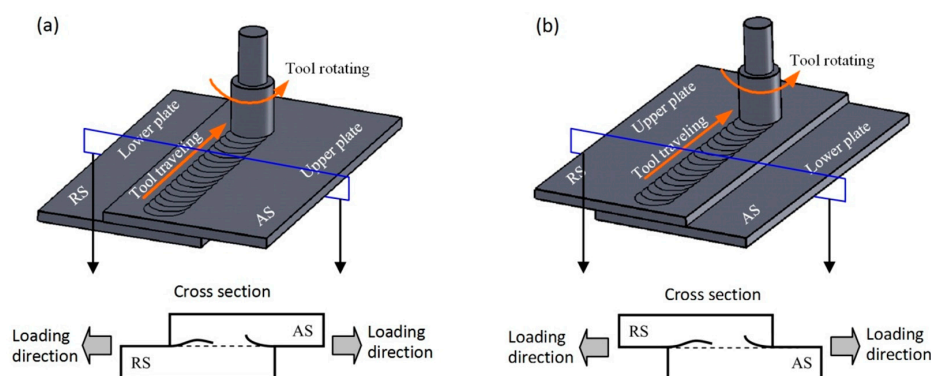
Different loading configurations in friction stir lap welding (FSLW): (a) advancing side (AS) loading; (b) retreating side (RS) loading [9].
